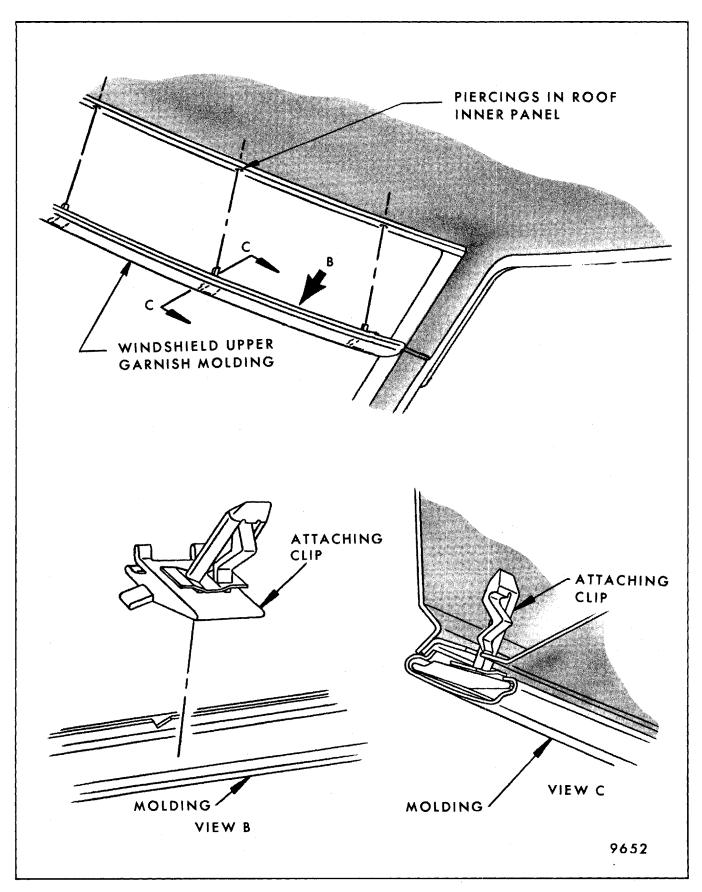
Windshield Upper Garnish Molding - A Styles
